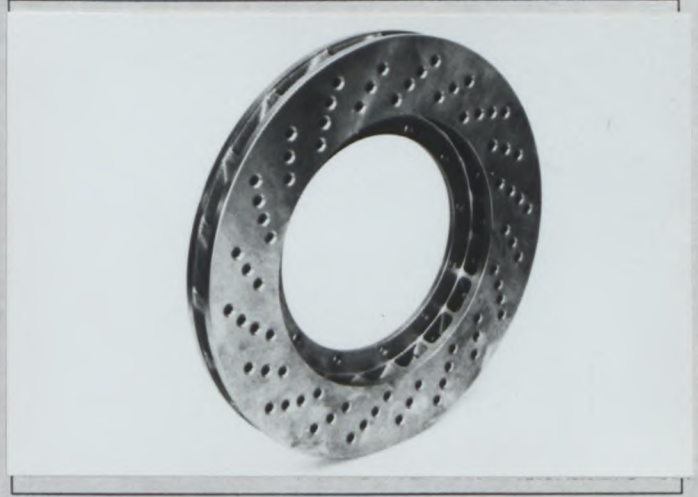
FRONT AND/OR REAR BRAKE DISC
